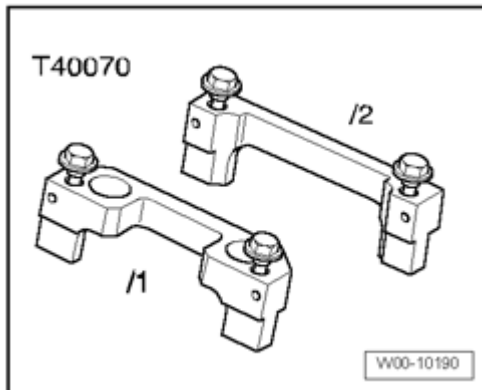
Camshaft Clamp T40070 , Qty. 2
